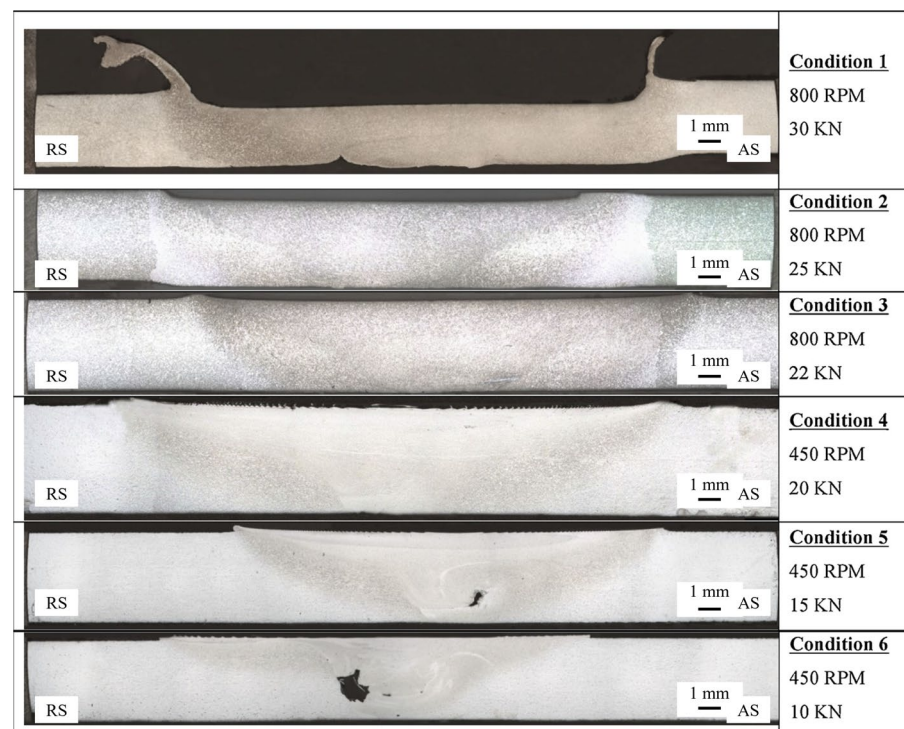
Butt FSW of 4 mm thick AISI 410S. Cross-section of different welded conditions ($v = 60 \text{ mm/min}$) [114].
